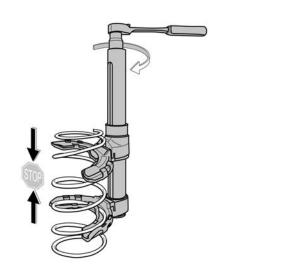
If necessary, relieve pressure on the spring via the auxiliary drive.
